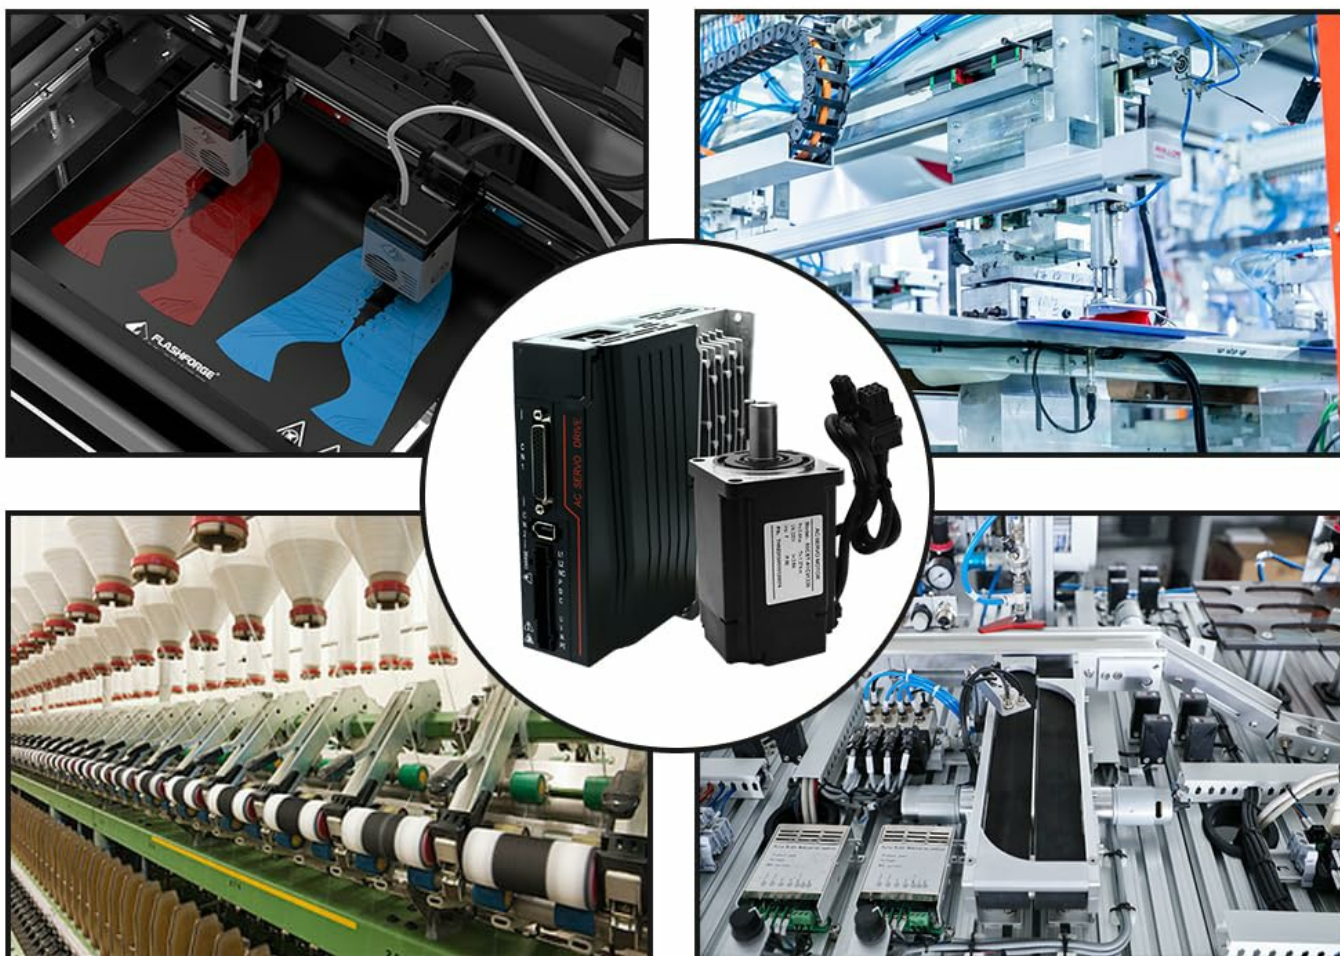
Application Scenarios. This image displays various industrial settings where the servo motor and drive system can be utilized, including 3D printing, automated assembly lines, textile machinery, and other precision manufacturing processes.
